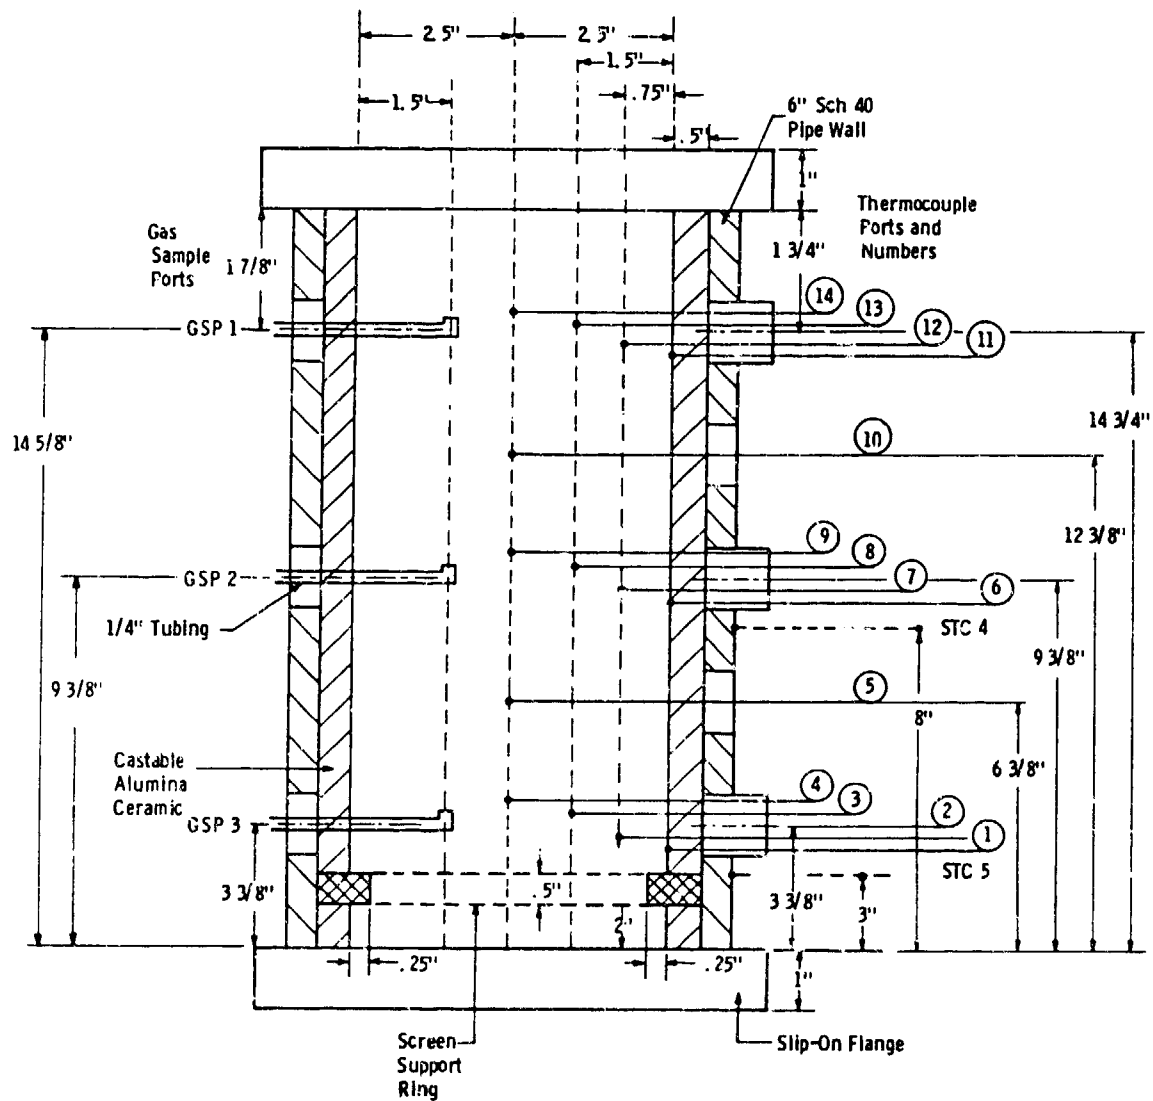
A -- Reformer Thermocouple and Gas Sample Port Locations
